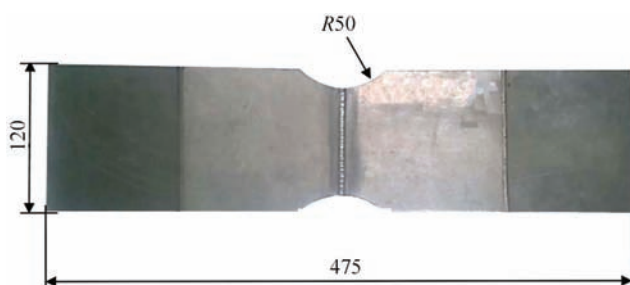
Specimen of welded joint of AMg6 alloy for fatigue tests
